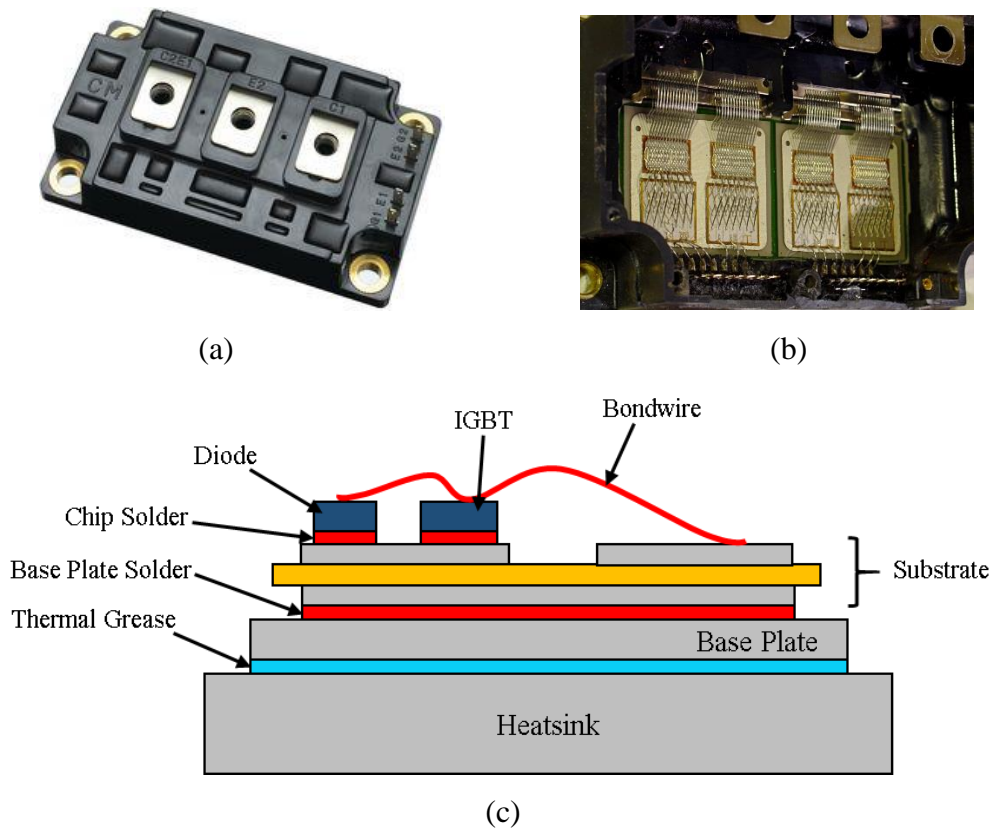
Conventional IGBT module (a) & (b) outline and detailed view [13]; (c) Schematic cross sectional view
